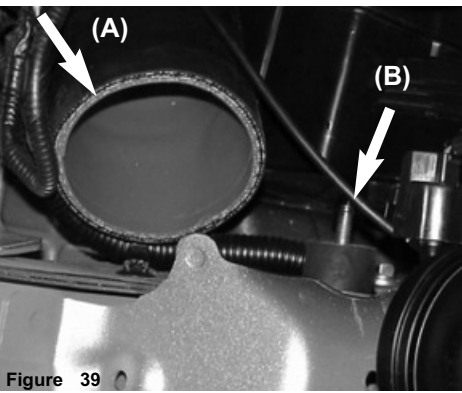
The lower end of the silicone hose is inserted into the driver side bumper corner (A). Note, the vibra-mount to the side of the silicone hose (B).
